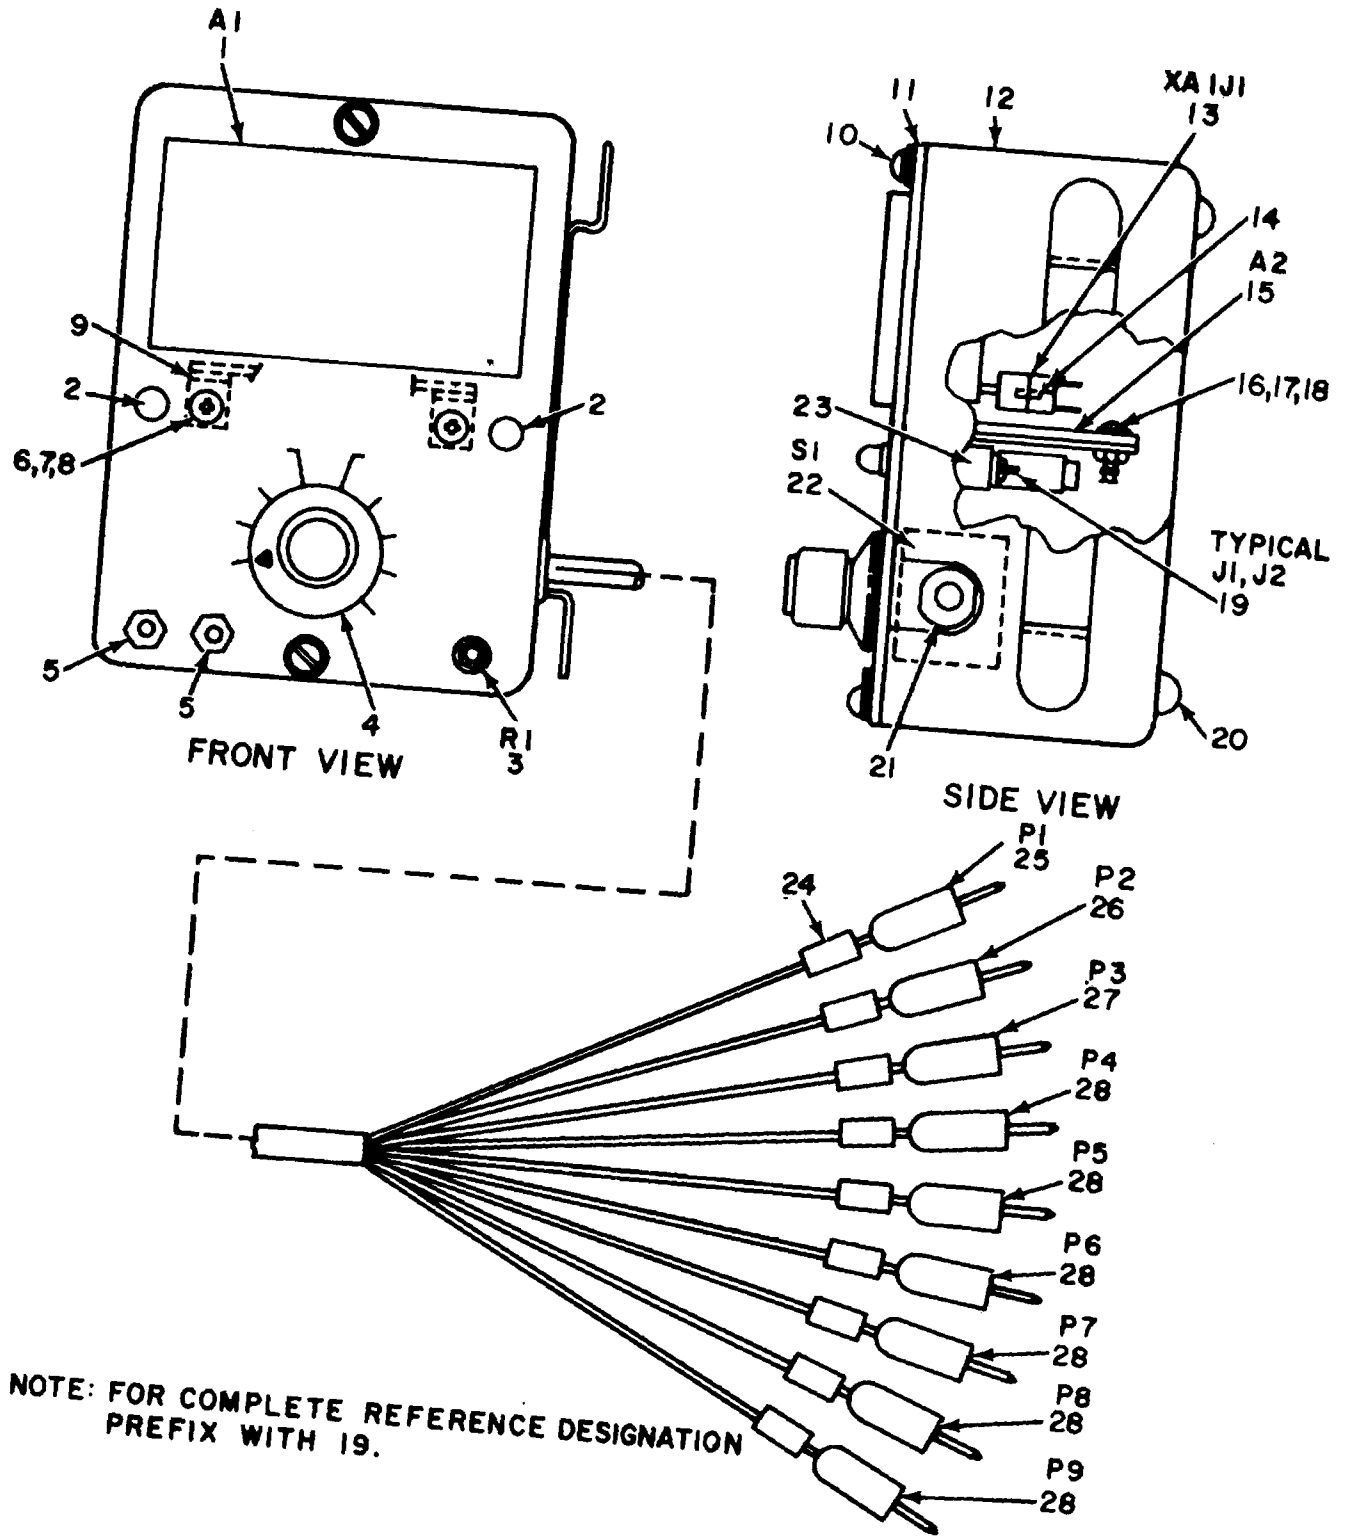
Ⓞ. Panel Assembly E60016-11 (Sheet 1 of 2).
